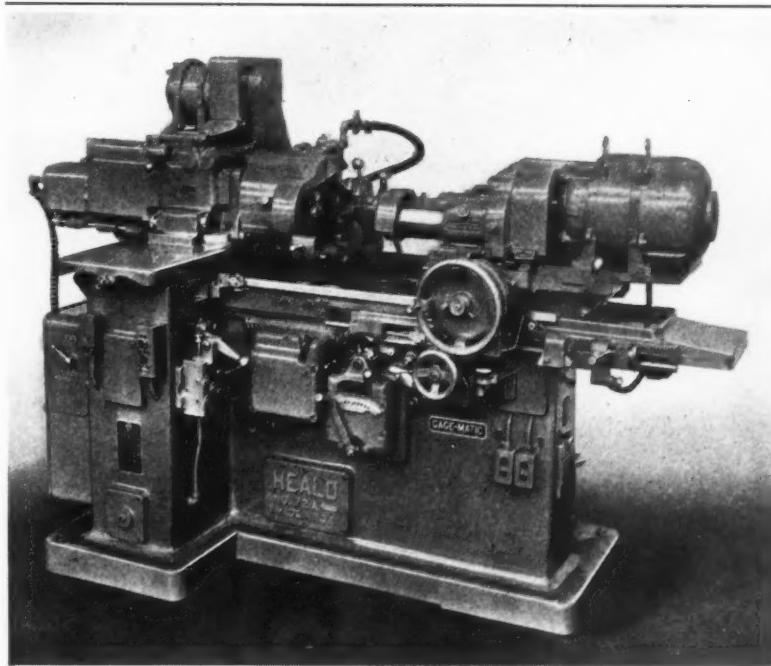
Heald Internal and Face Grinding Machine with Gage-Matic Equipment
